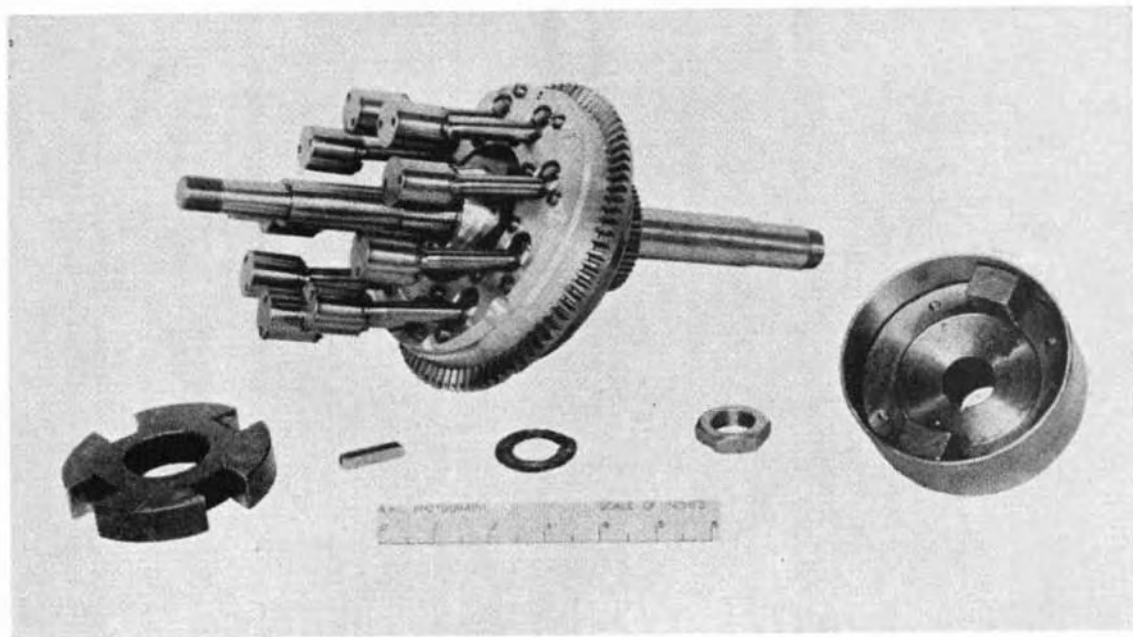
“G” TYPE MOTOR FOR A.R.L. POWER DRIVE. ASSEMBLY FOR PISTONS AND SWASH PLATE
